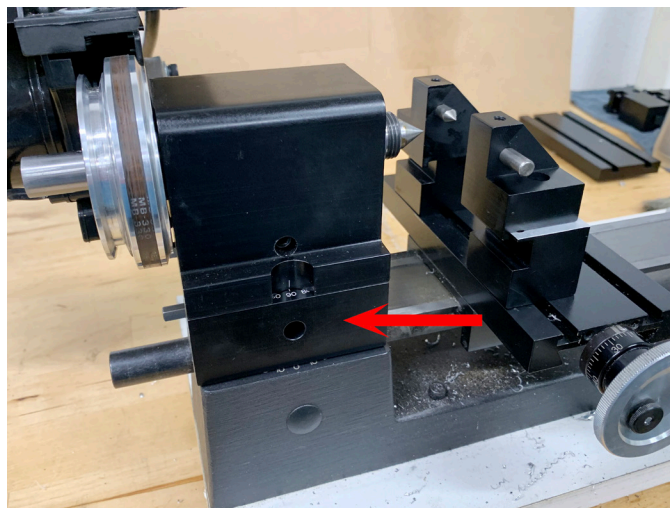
The red arrow shows the Headstock Riser Block mounted to the lathe base. P/N 12950 is just the riser block. P/N 1297 is the full assembly headstock riser with pivot pin, head key, and screws.
